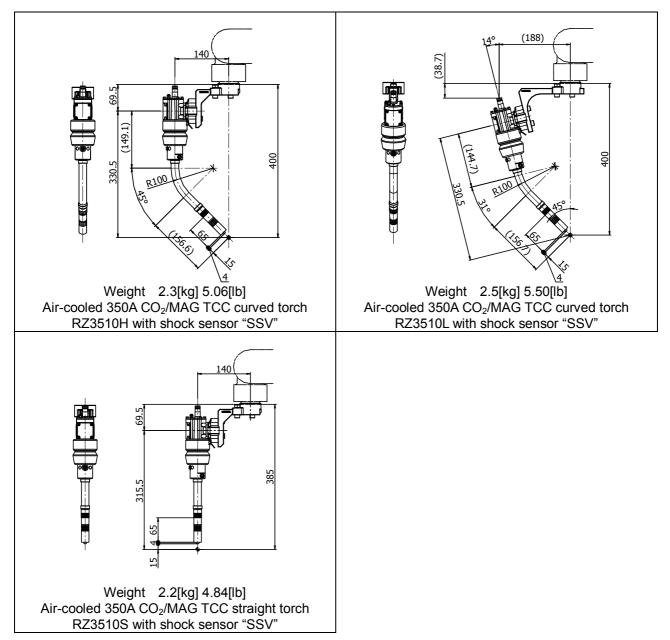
Outline drawing of Air-cooled 350A TCC torch (First diameter nozzle type) (for V type, A type) Unit (mm)
